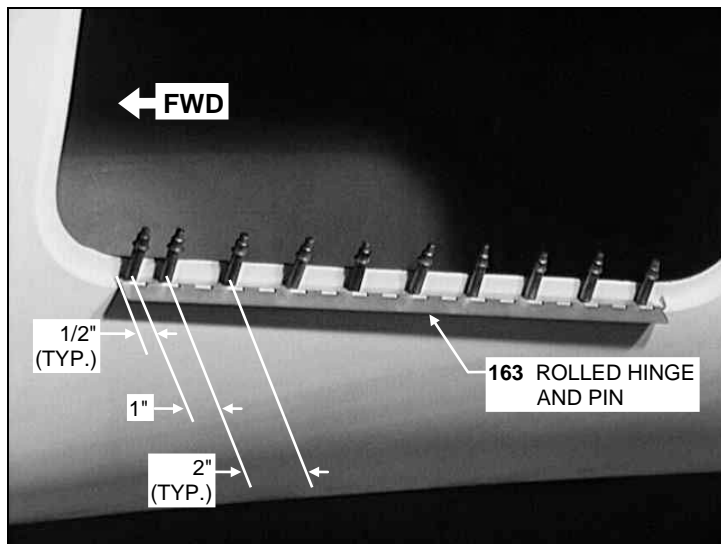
shows how the hinge is positioned inside the cutout. Before positioning the hinge, mark and center punch ten rivet hole locations on the narrower hinge half. These locations should be centered on the width of the flange, and the forward- and aft-most of them should be 1/2" from the ends. Between the end hole locations, the spacing of the remaining eight locations is not critical.
